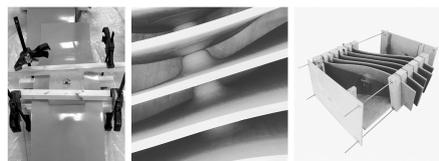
Urban Curtain. Nodal connector integrally cast with elastomer sheets (middle). Reverse casting for male connector (left) and assembly in first prototype mold (right).
